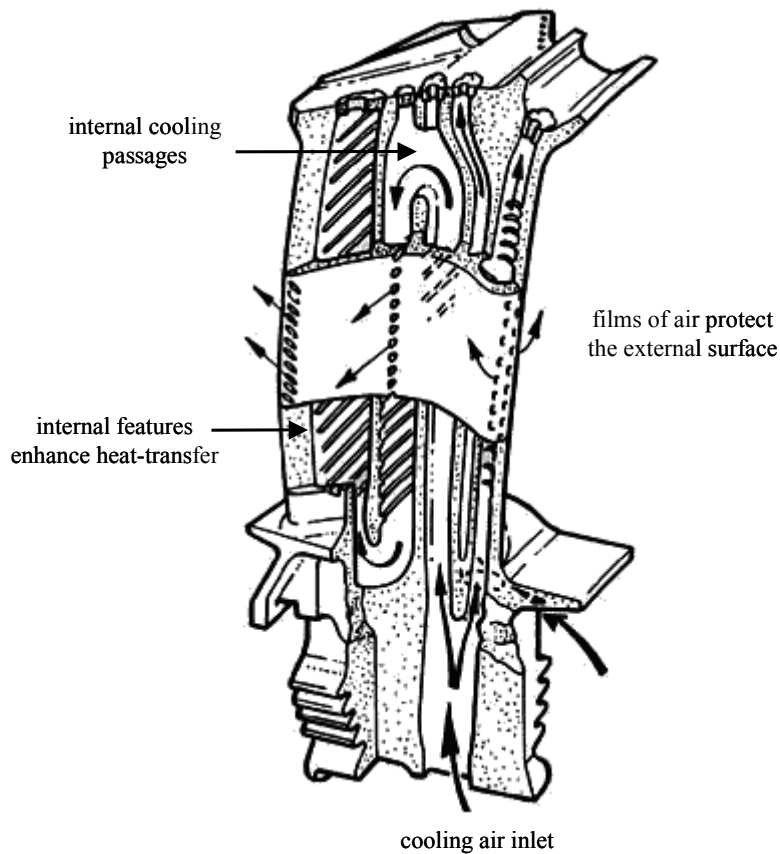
A cut-away view of a turbine blade showing the internal cooling system passages.
